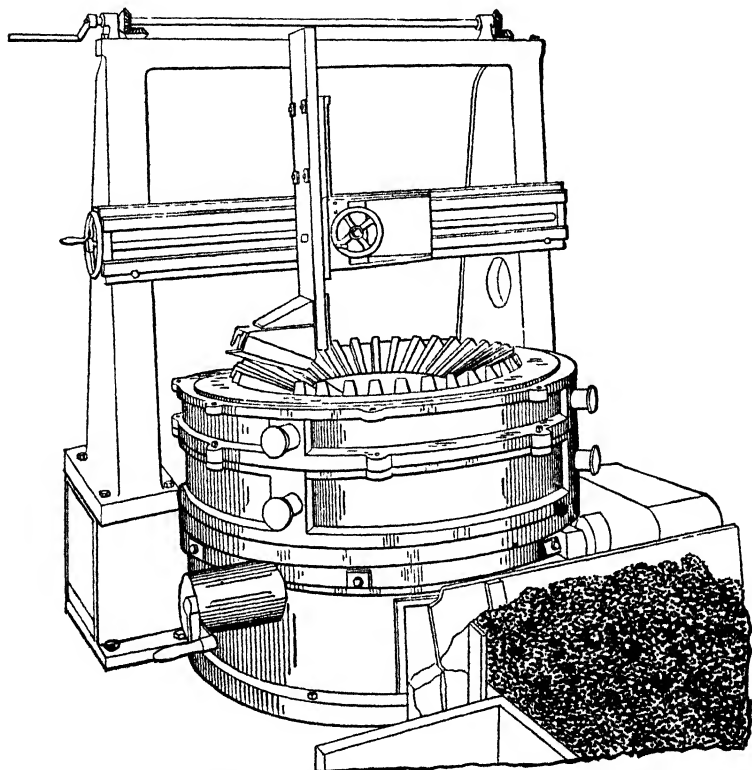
Machine for forming the teeth of a bevel gear.
